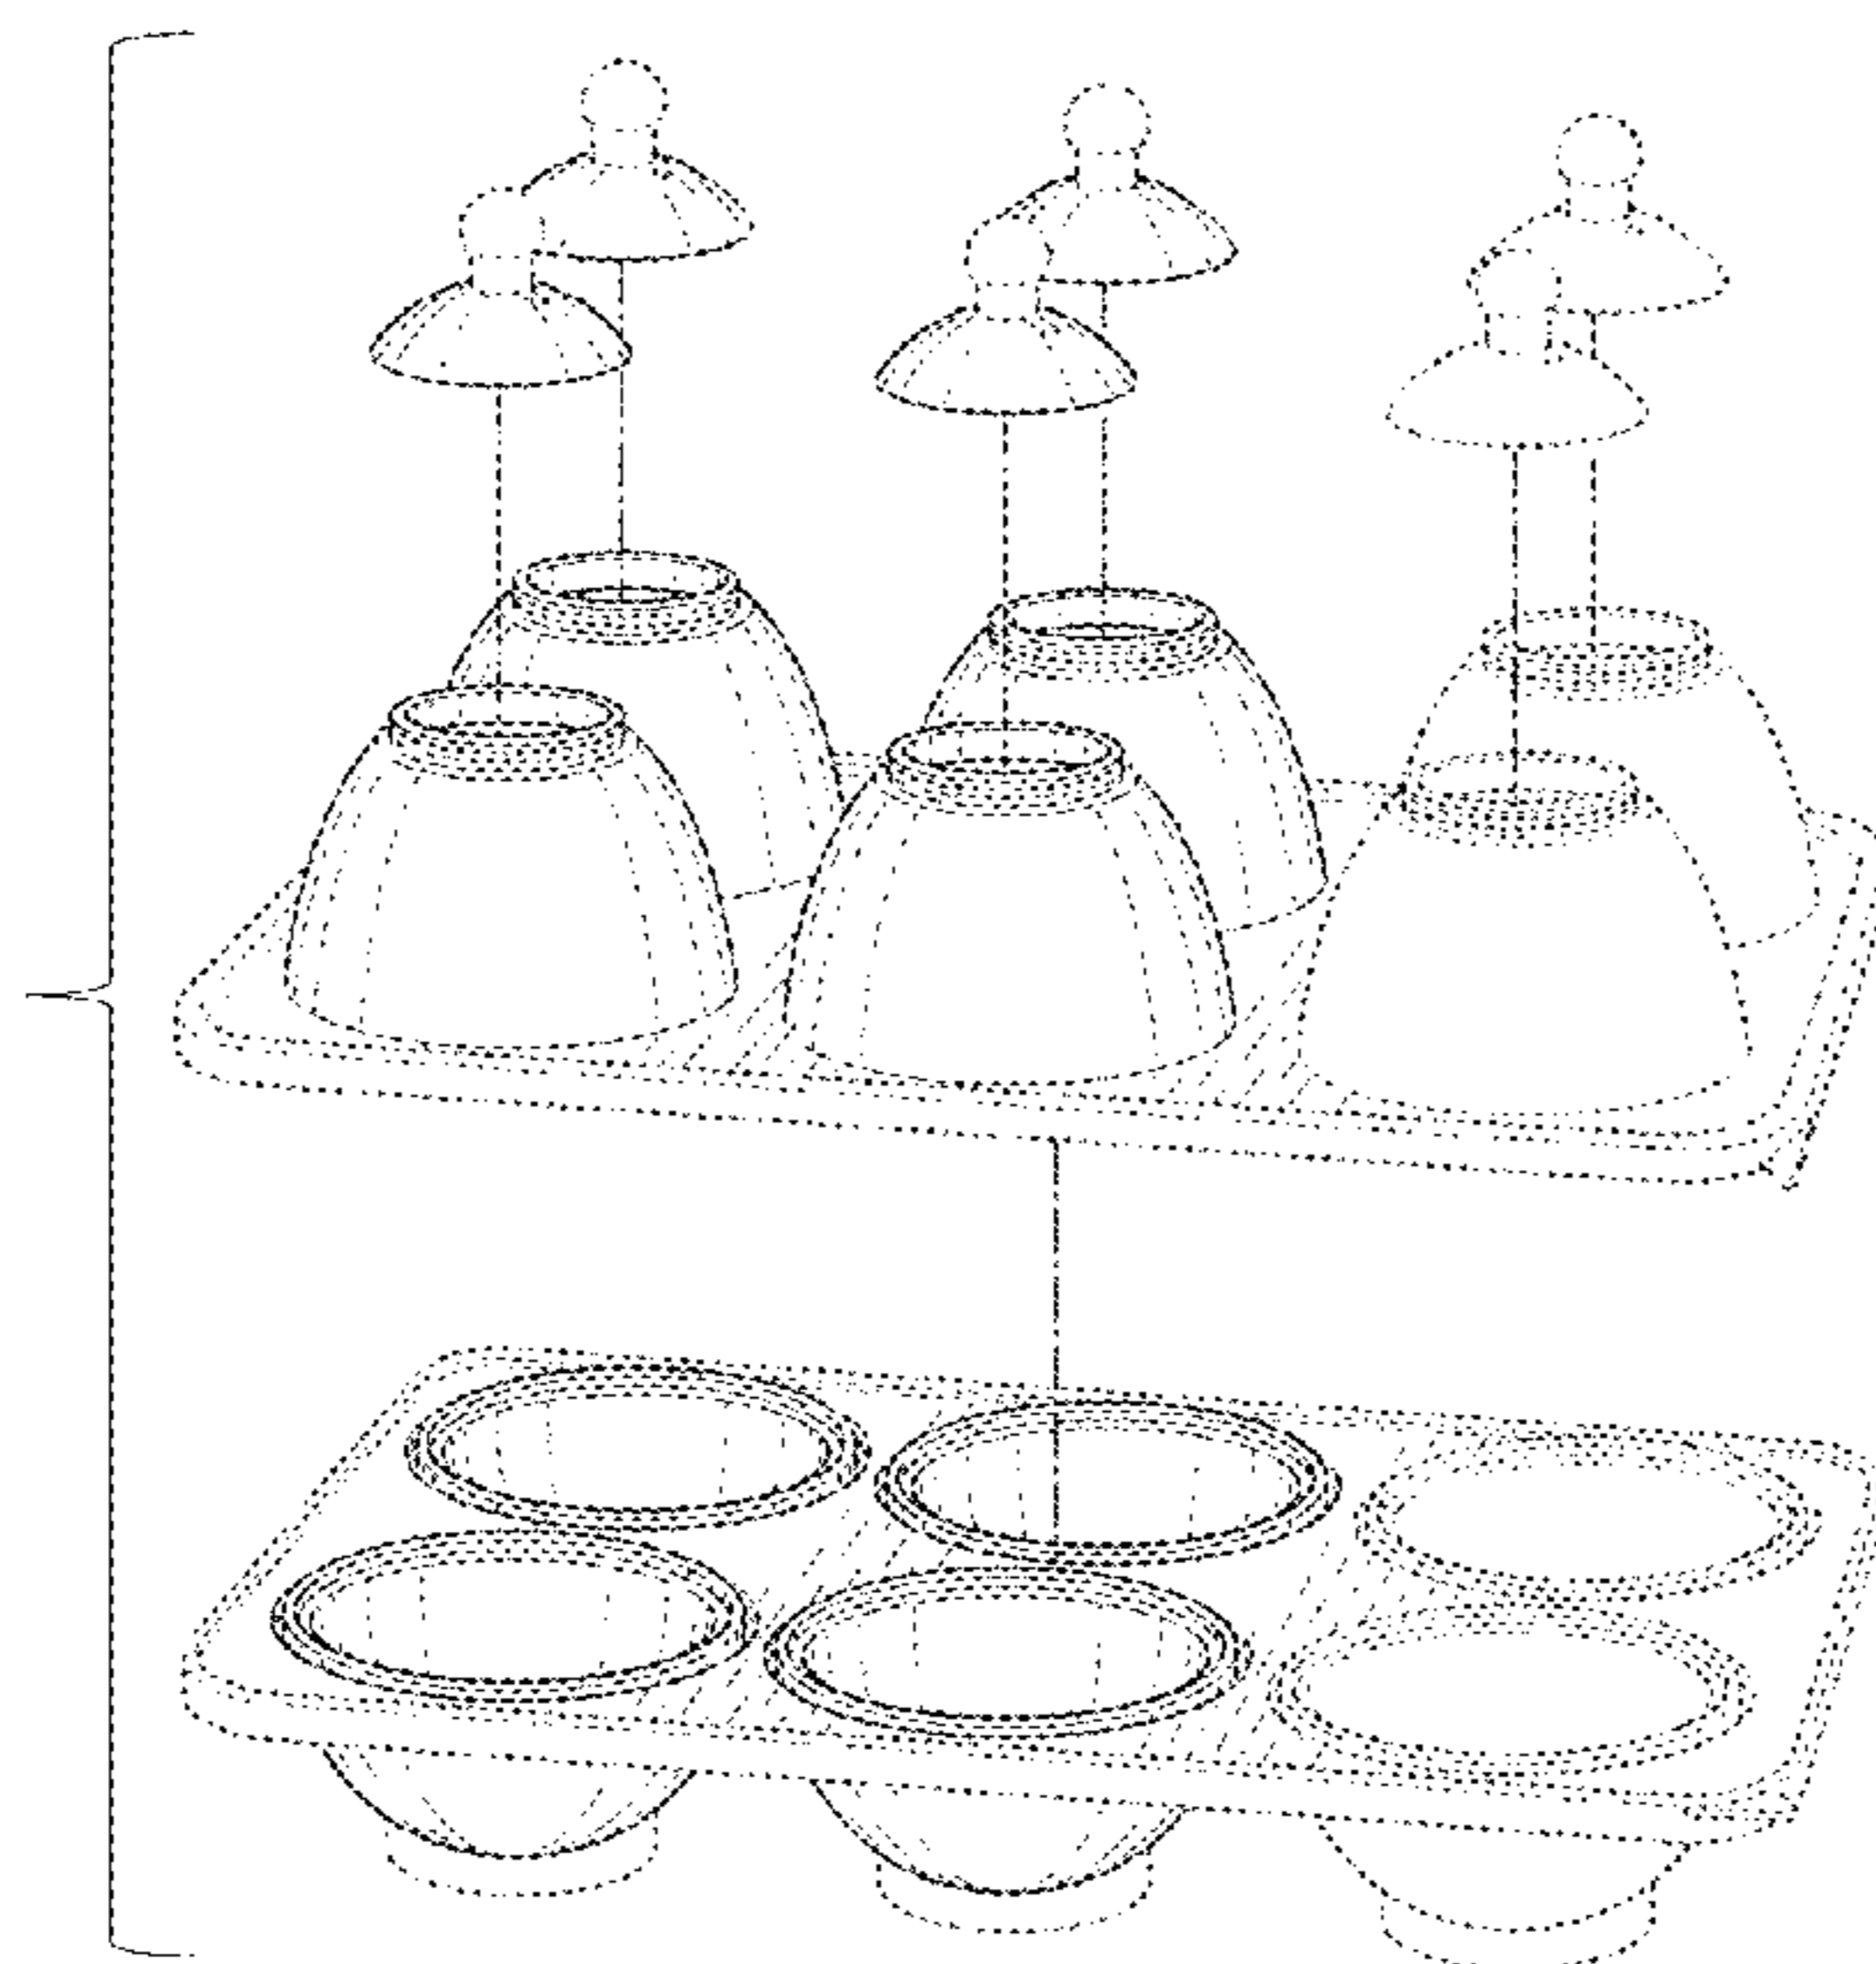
is an exploded perspective view of the egg cooking device of FIG. 1 in an open state;
